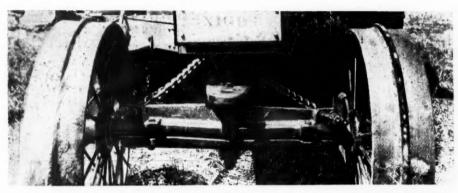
The old style tractor axle consisting of a steel bar strengthened with castings clamped upon it
